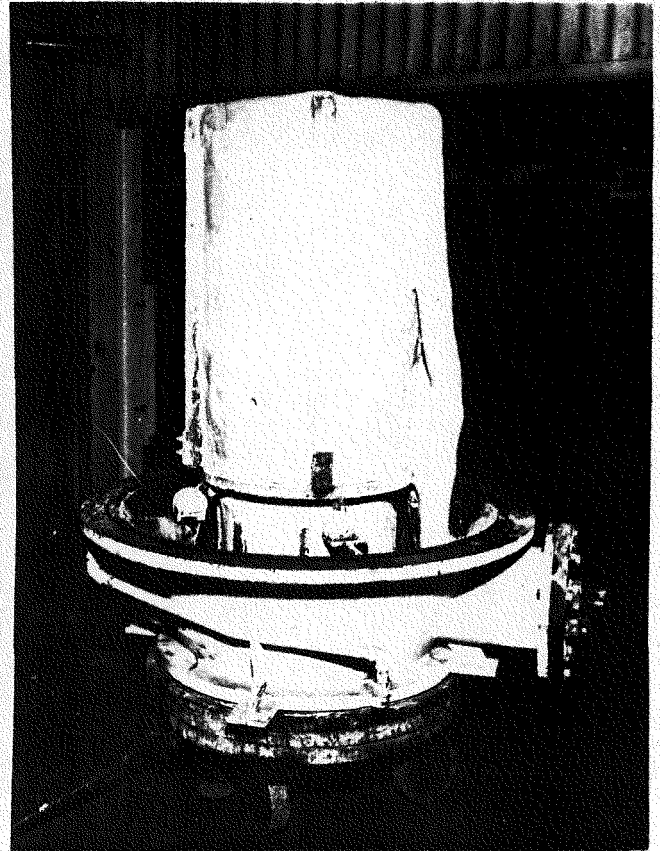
Completed remelt coil assembly. "Mud-like" ceramic grouting is used on outer diameter of coil for protection against spill metal. Note mold coil in lower section of tank.
